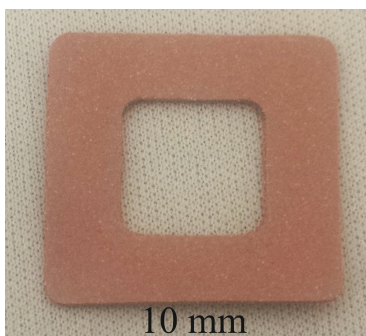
Gasket punched from larger sheet of Laird Tflex SF600 using custom punch and die.
